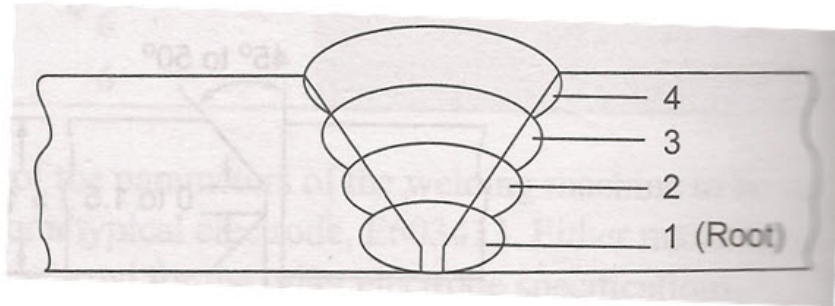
A typical multipass bead formed by manual metal arc welding
